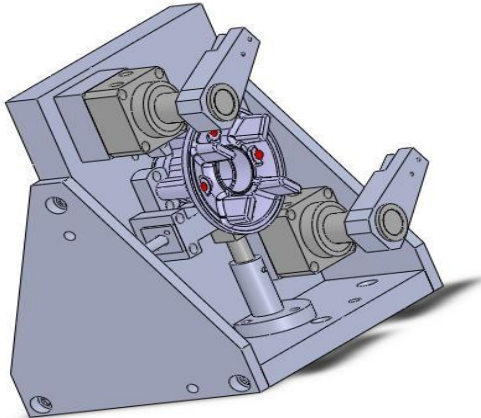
2nd Assembly layout of fixture and coupling 4-rubber component
